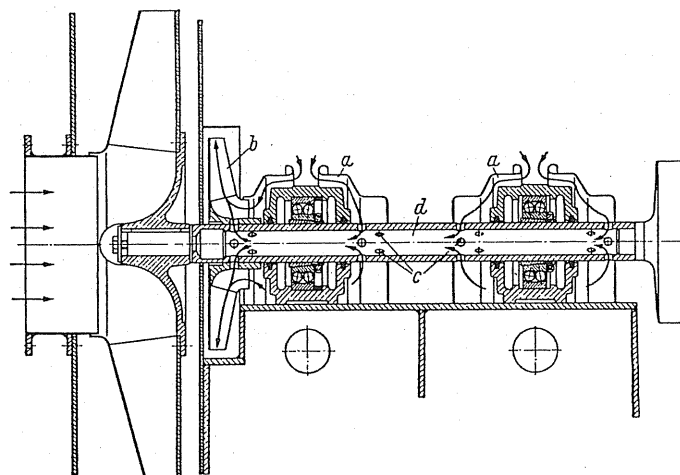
Air-cooled bearings for fan handling hot gases (Mabag, Sulzbach). *a*, bearing covers; *b*, cooling impeller; *c*, openings in a hollow shaft for sucking air for cooling purposes; *d*, hollow shaft.
